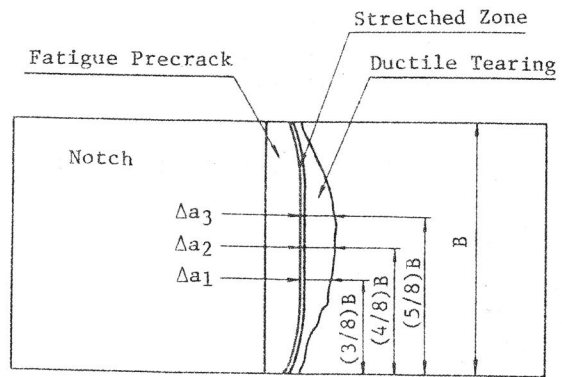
Schematic fracture appearance of J_{IC} specimen and measurement of Δa in the JSME Standard.
